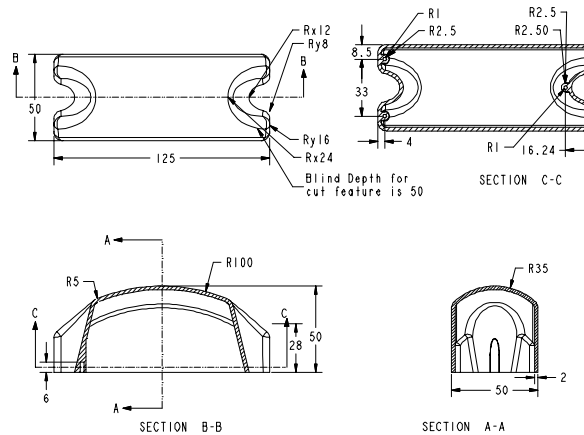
Top view, sectioned front view, sectioned right-side view, and sectioned bottom view of the carburetor cover
